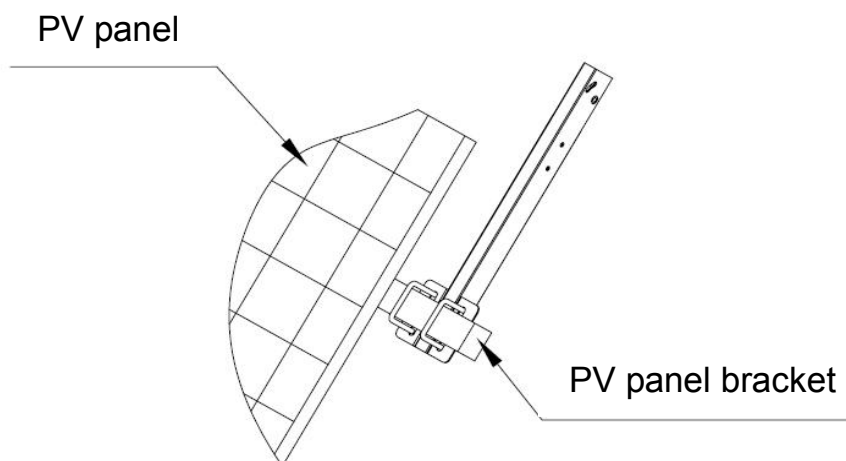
Securing diagonal supporting arm on PV panel bracket
